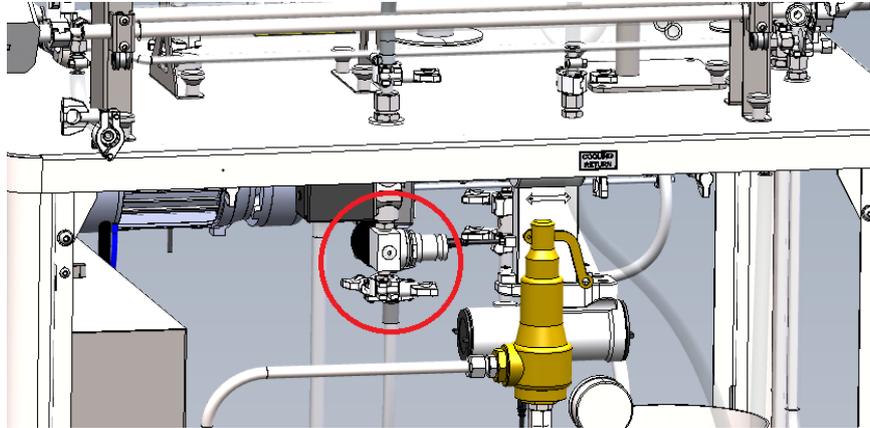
Position of the pressure regulator, where a coolant must be connected to for the -51 controllable cooling option.
